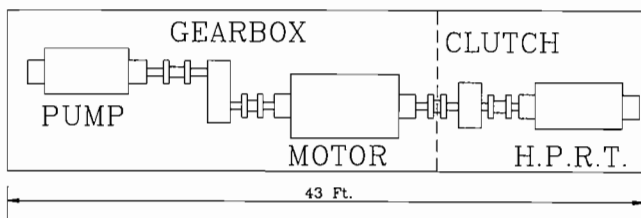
Schematic Showing Pump/Gearbox/Motor/Clutch/HPRT Package.
